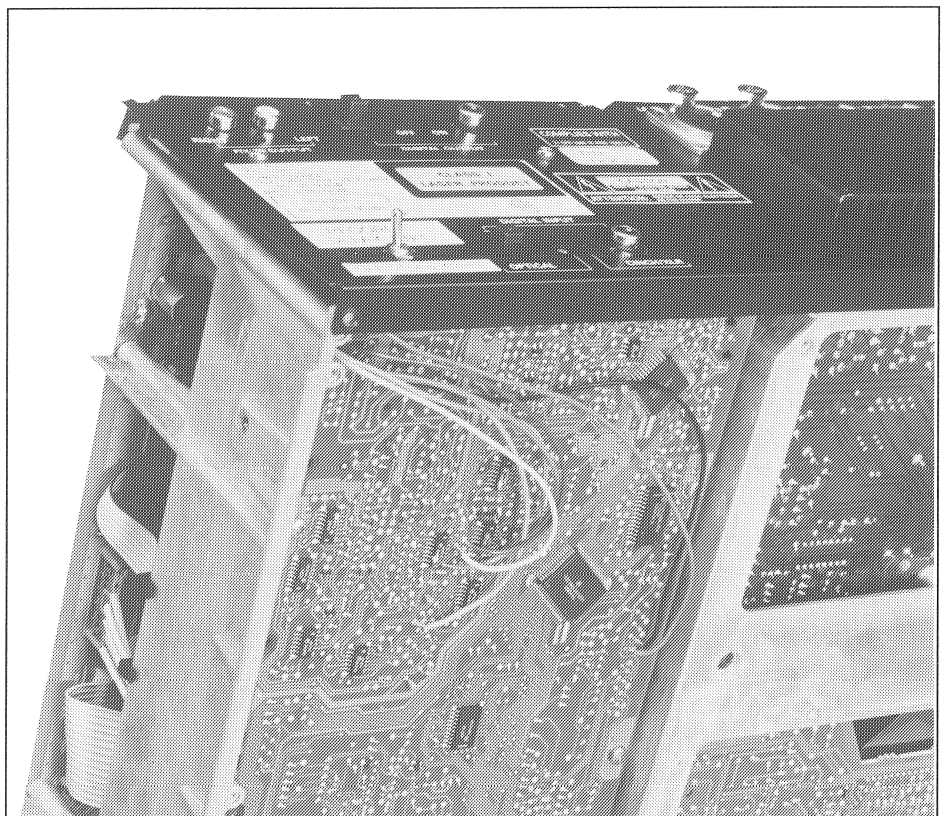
Connection of the special connection cable on the encoder board. Rear bottom view
